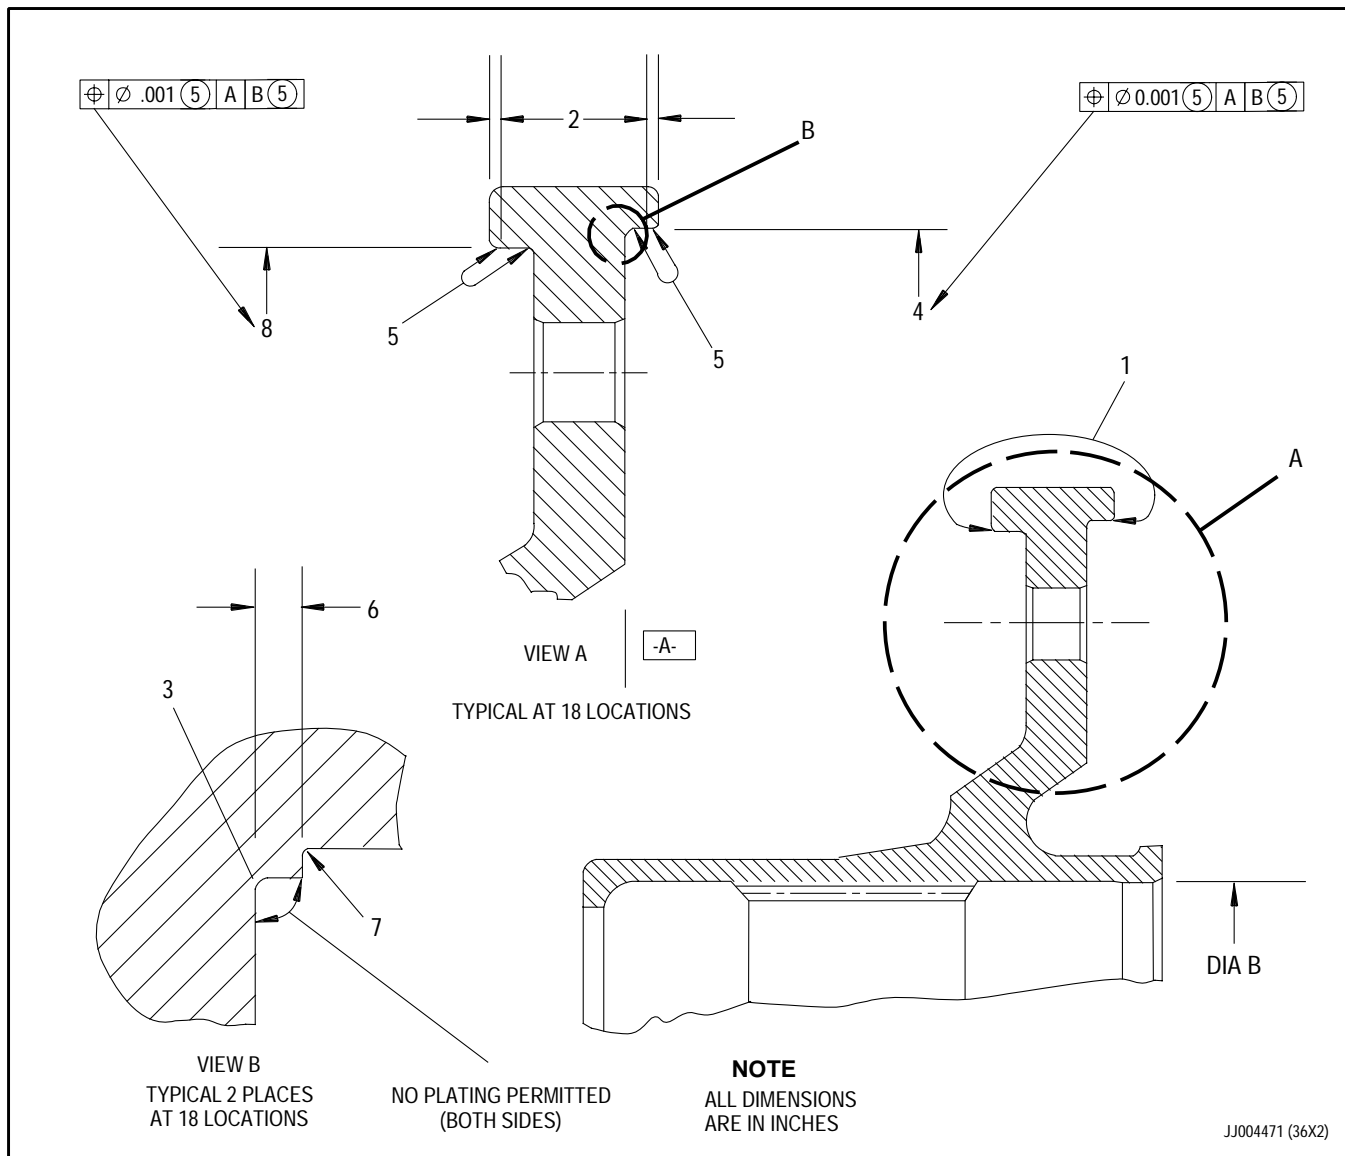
Rear Turbine Hub Assembly - Third and Fourth Stage Turbine Disks Snap Diameter Repairs
